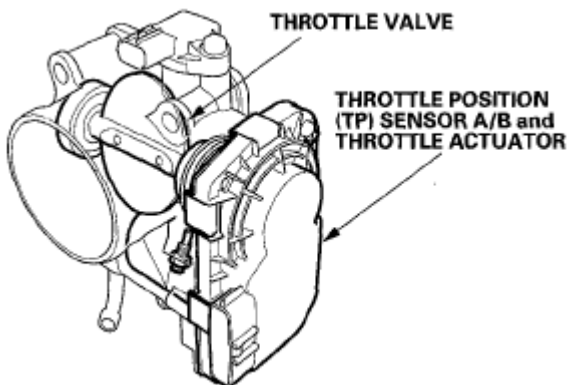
Identifying Throttle Valve, Throttle Position (TP) Sensor A/B And Throttle Actuator
